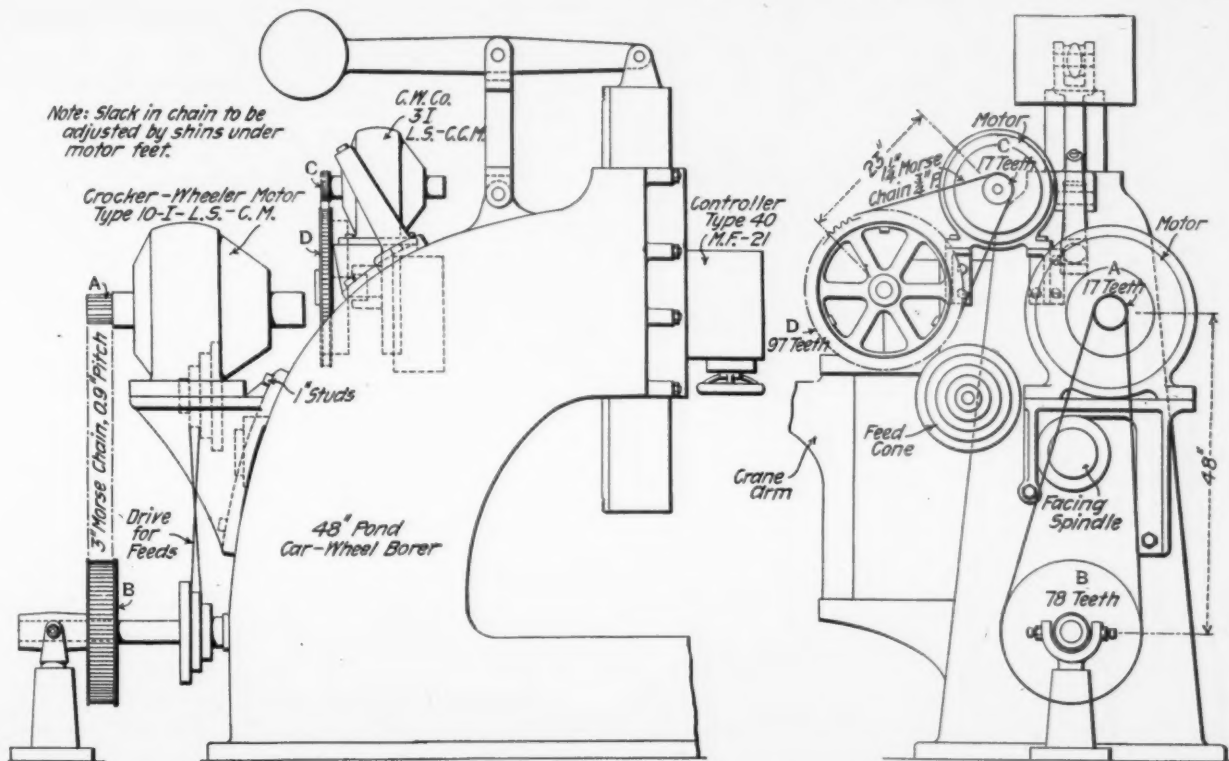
DETAILS OF THE APPLICATION OF INDIVIDUAL DRIVING TO THE 48-INCH POND CAR-WHEEL BORING MACHINE, SHOWING ALSO ARRANGEMENT OF SEPARATE MOTOR FOR OPERATING THE WHEEL HOISTING CRANE.
